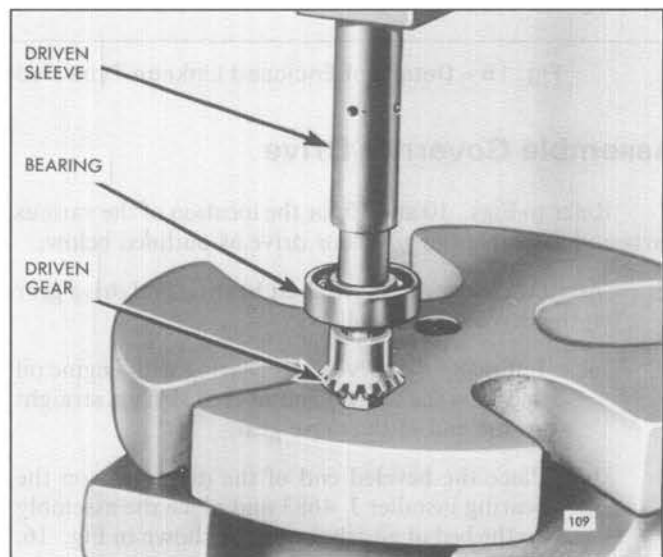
Installing Bearing and Driven Sleeve on Driven Gear
